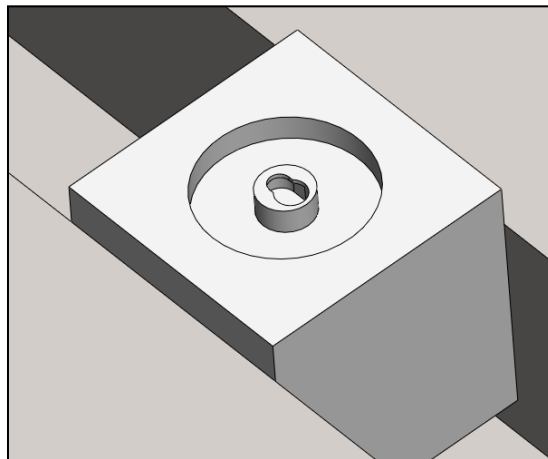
In step 6, a 6.25 mm diameter circle would be cut around the slot with a 10 mm end mill bit to a depth of 3 mm.
